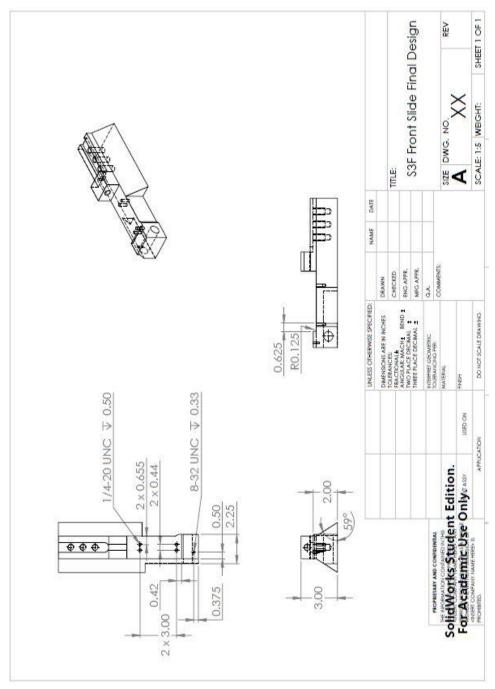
Dimensioned CAD drawing of the final modified S3F slide with Wintriss bolt-on strain link and wire strain relief clamp mounts.
